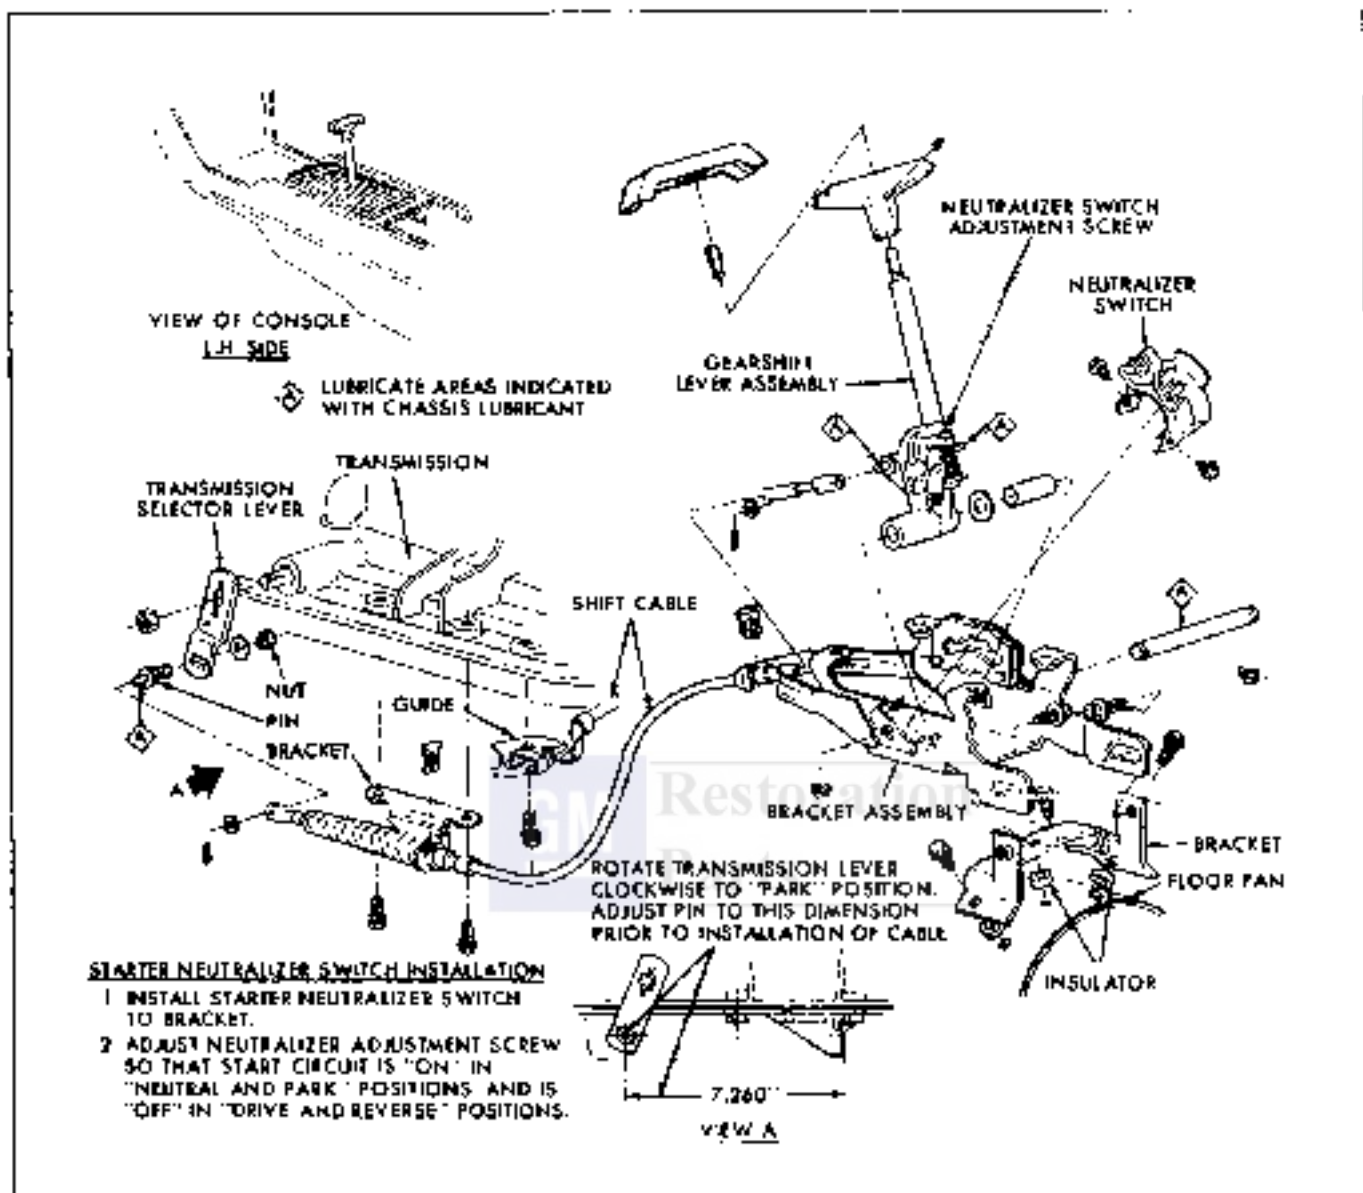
E-6 Gearshift Controls (Console) - Pontiac
